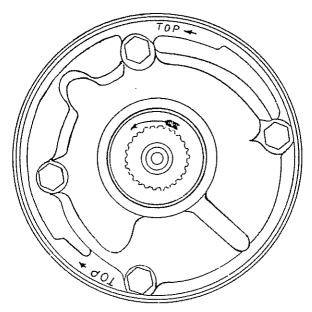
VIEW FACING PUMP AND INPUT SHAFT
